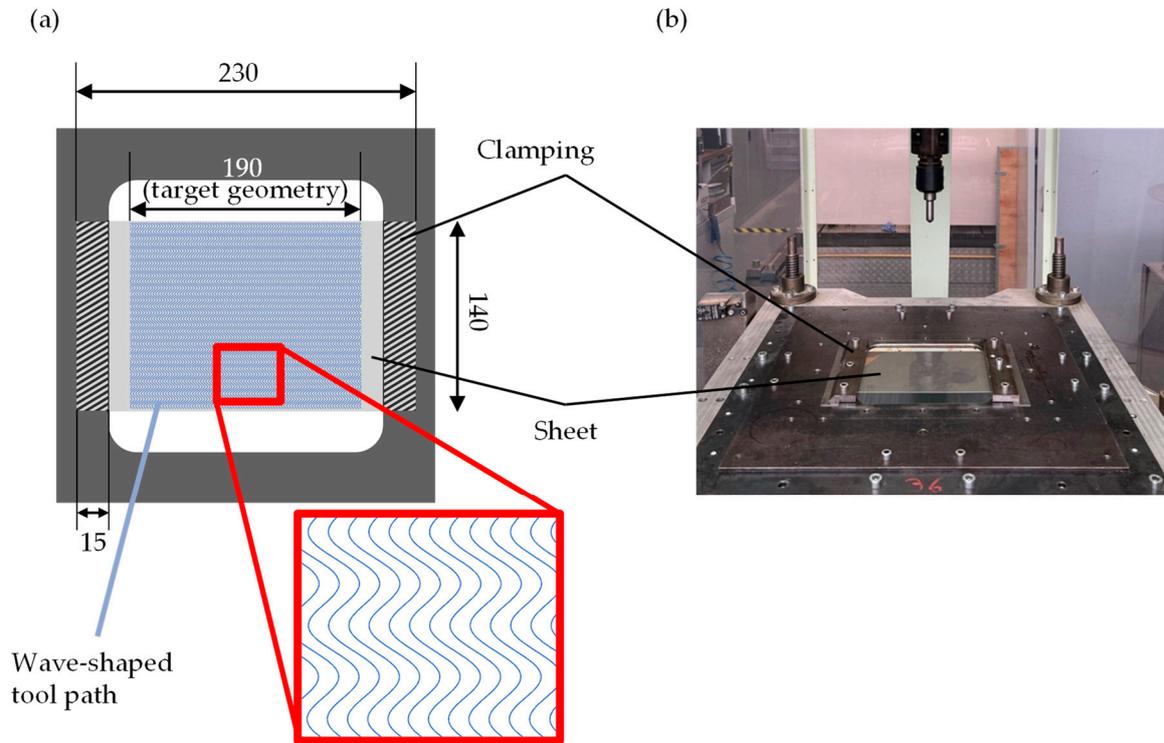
(a) Schematic experimental setup: wave-shaped tool path (blue lines, magnified view in red box), (b) experimental setup with clamped sheet (units in mm).
